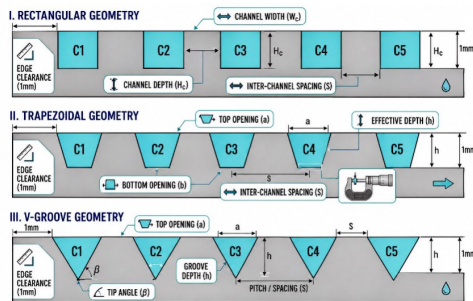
Illustration of different shapes of heat sink sections with its dimensions
